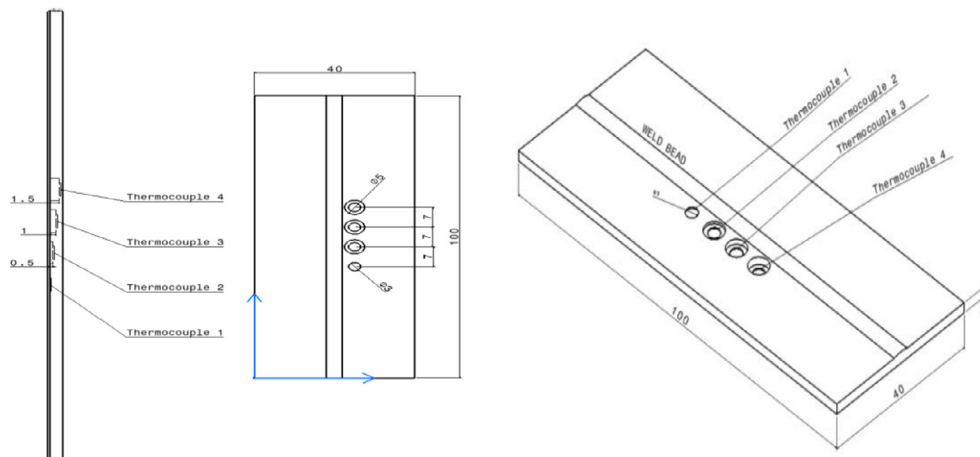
Schematic diagram of weld plate and possession of thermocouple.
